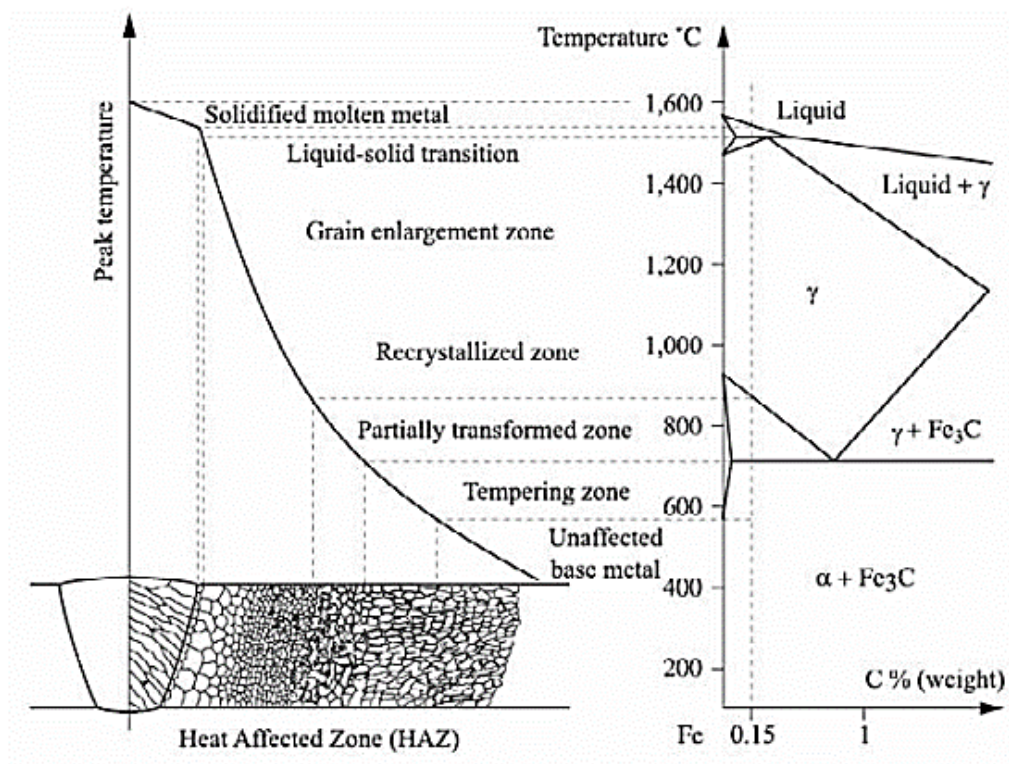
Scheme of phase transformation of the workpiece during welding [13]
